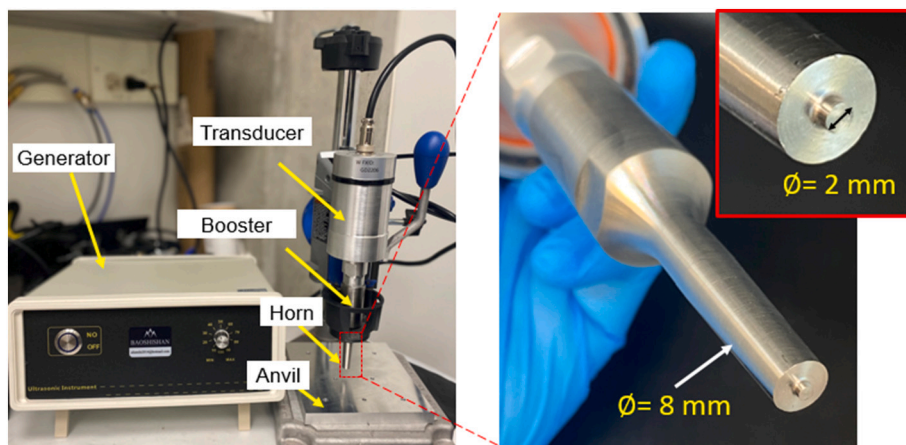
Representative image of the ultrasonic plastic welding (UW) setup (left panel) with the welding horn and knurl pattern (right panel).
